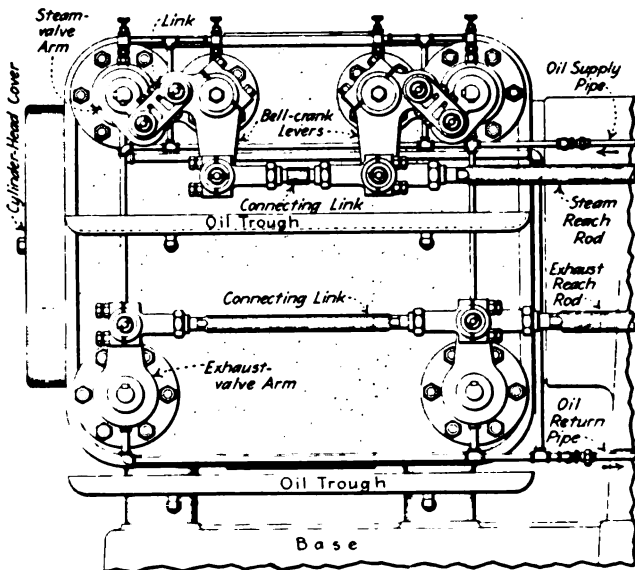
Valve gear of Ames four-valve non-releasing Corliss engines. (Ames Iron Works.)
